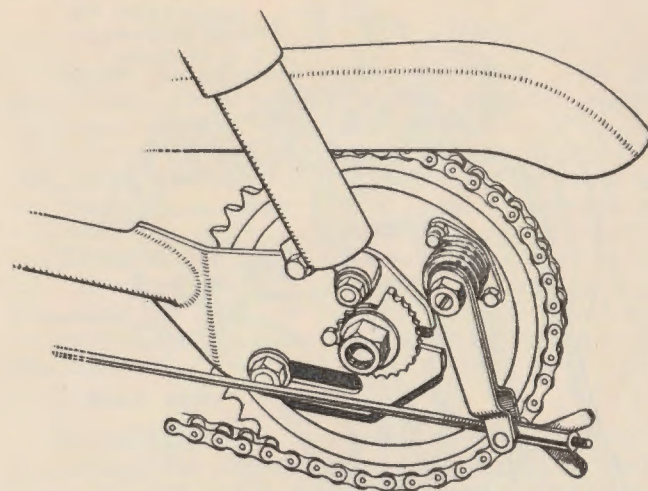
“Super Meteor.” The rear chain is adjusted by slackening the wheel spindle nuts and turning the notched cam plates on either side of the wheel fork. A wing nut on the end of the brake rod adjusts the rear brake.
